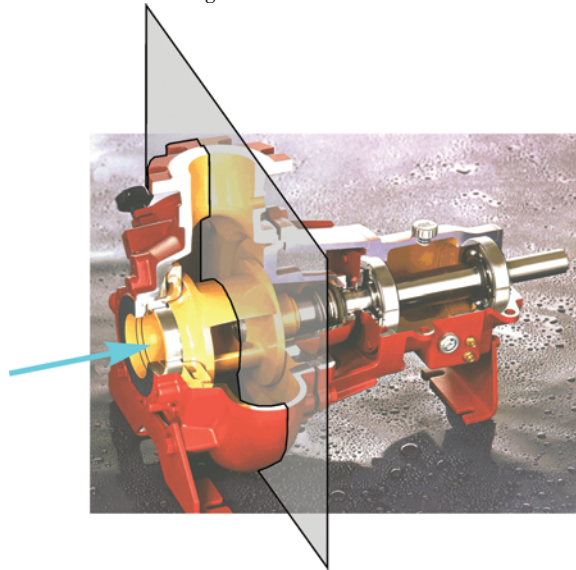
Single-stage sewage water pump with single-blade Impeller for dry installation with observation plane.
